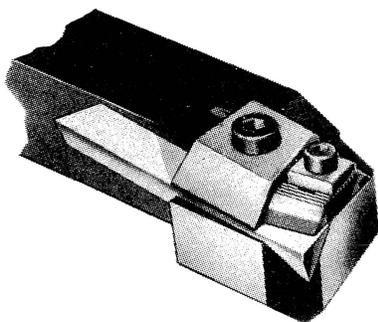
Toolholder with triangular toolbit and adjustable clamped chip breaker. (Courtesy Everede Tool Co, Chicago 39)
